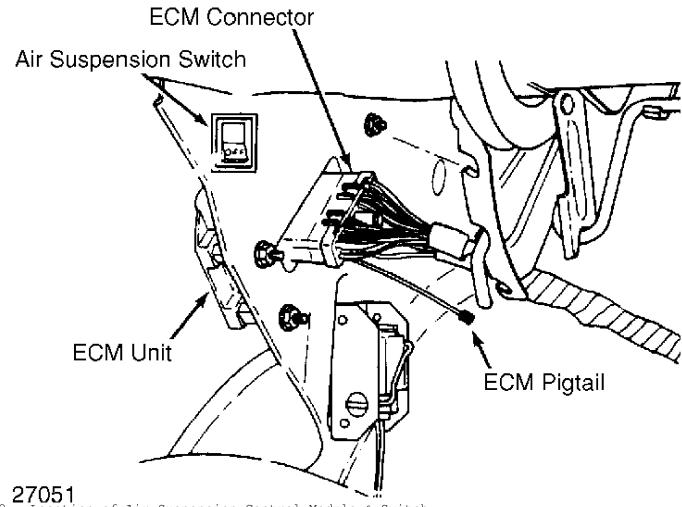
Location of Air Suspension Control Module & Switch Courtesy of Ford Motor Co.
